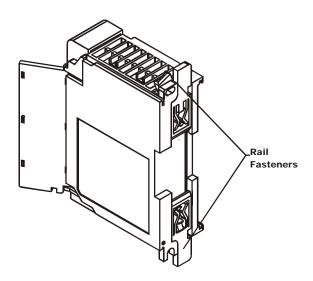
RAIL FASTENERS IN RETRACTED POSITION
